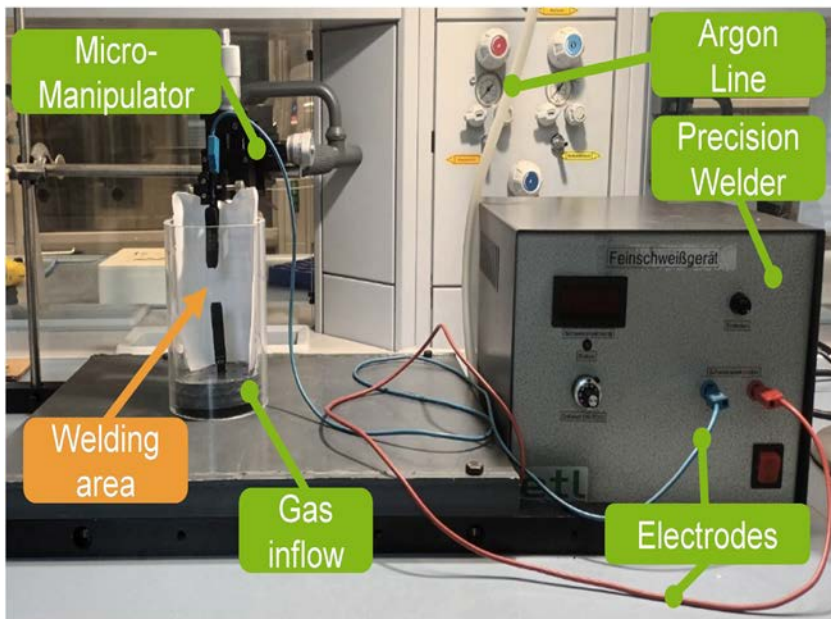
Welding setup for manufacturing of fine-wire thermocouples.
